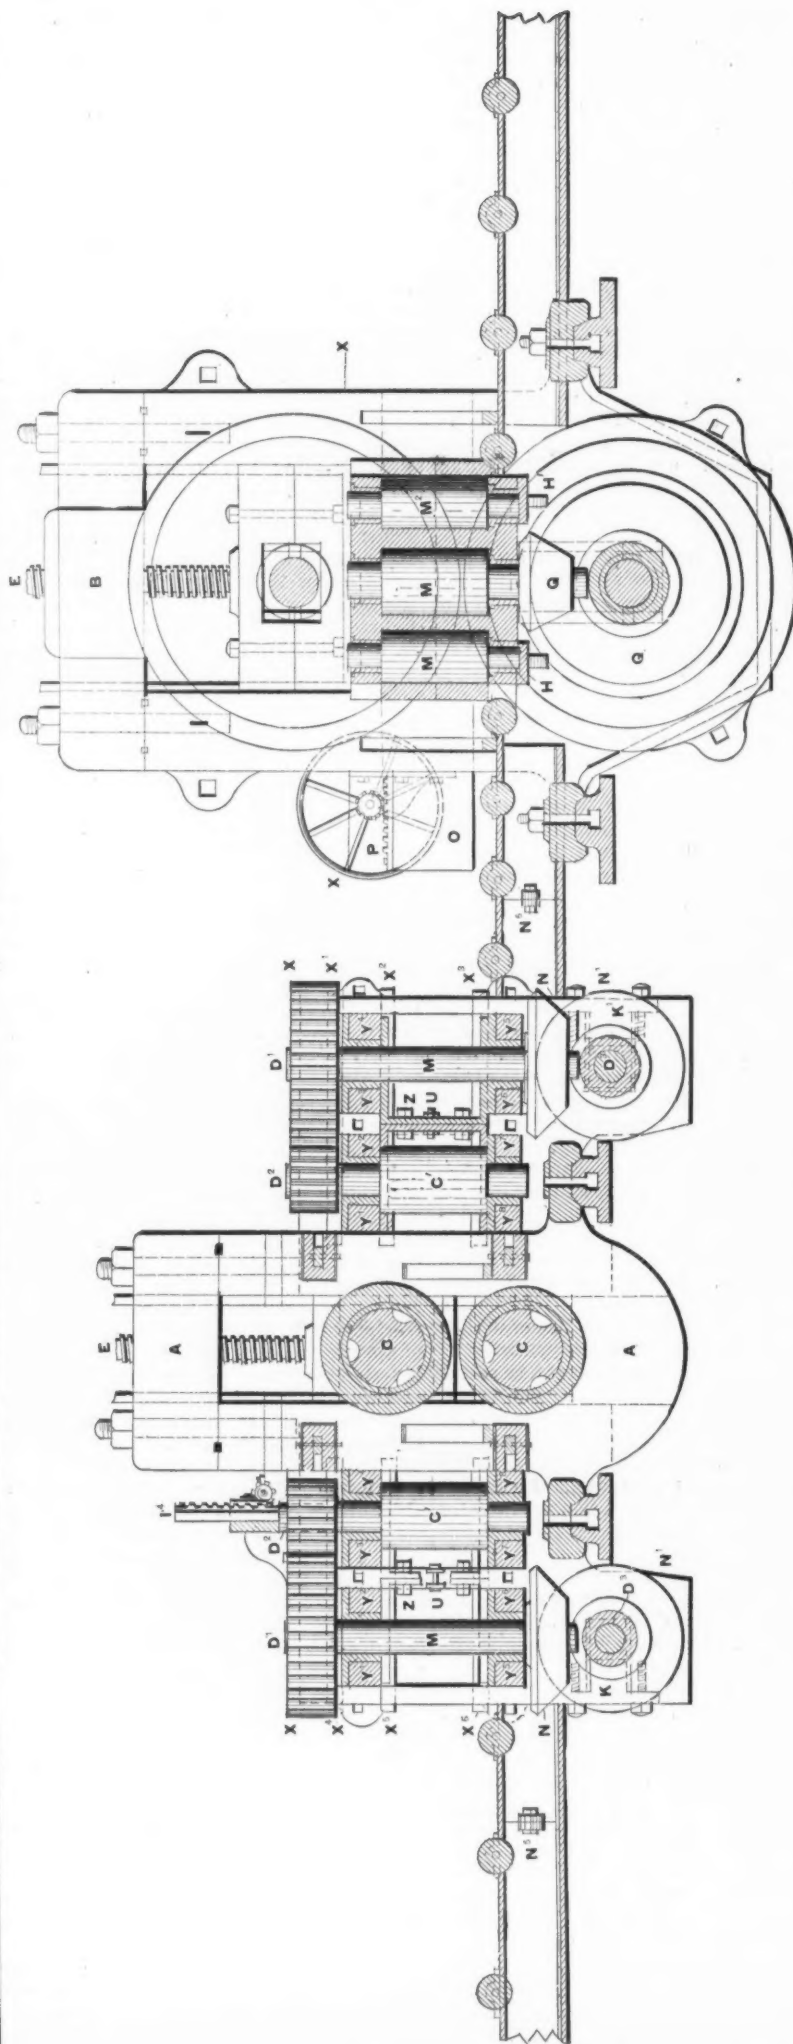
Longitudinal Section of Reese Universal Beam Mill.
